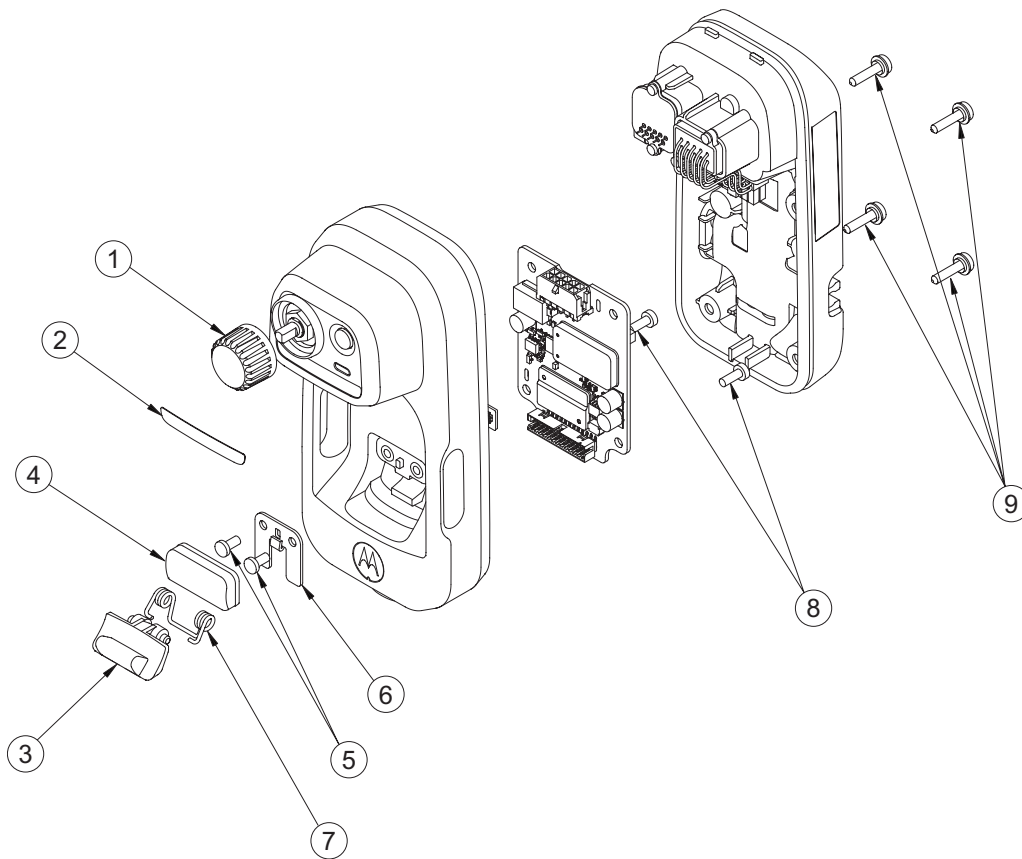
Telephone Style Control Head (Cradle) – Exploded View 3
